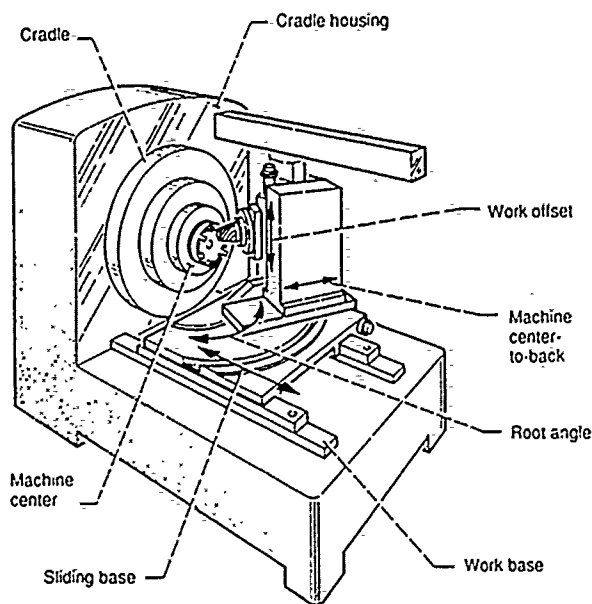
Machine used for spiral bevel gear tooth surface generation.
